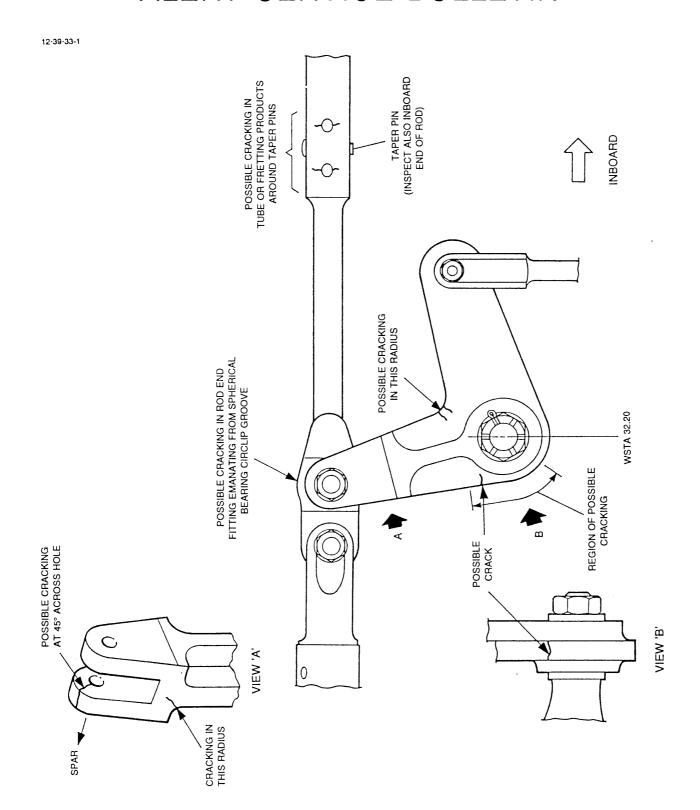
Possible Cracking on Flap Bellcrank and Flap Rod End Fittings
